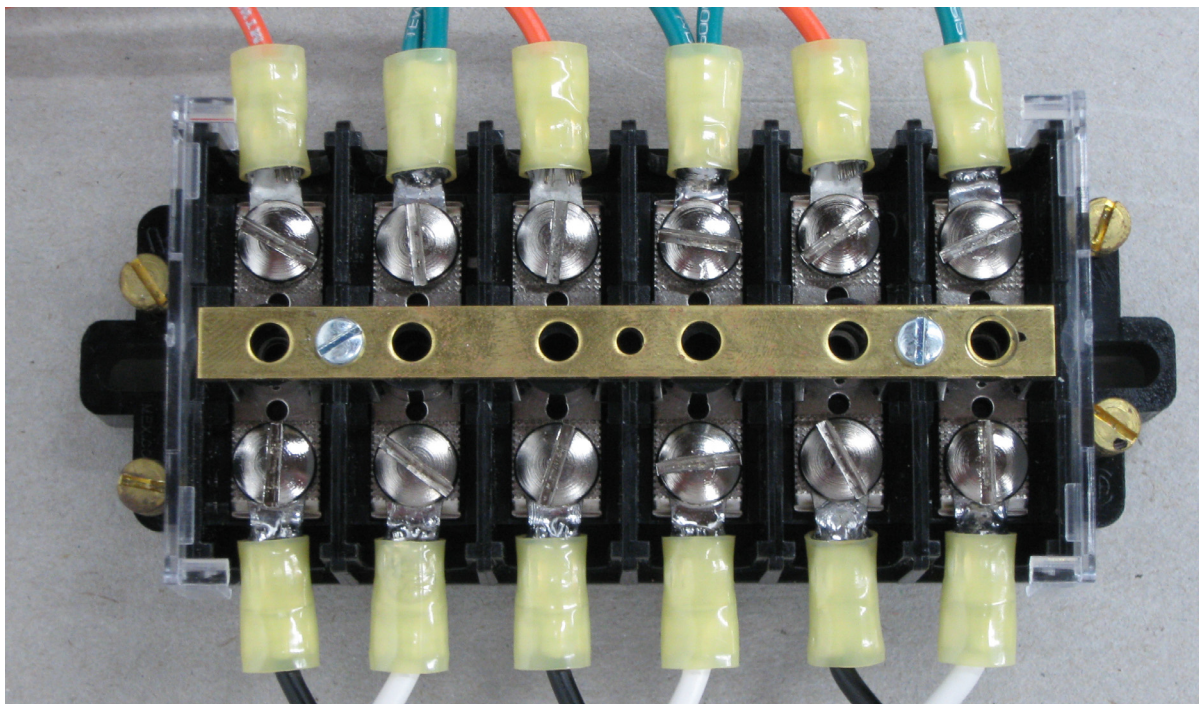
Typical Shorting Block with Wiring Installed
